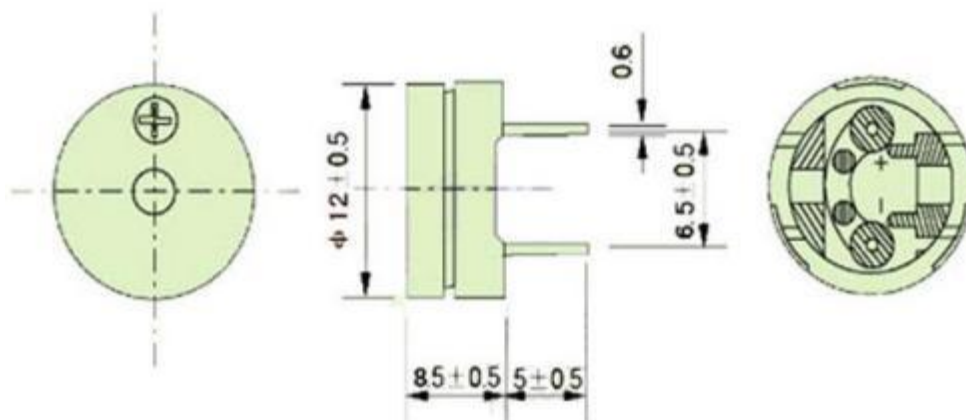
Dimension and footprint of SP1 (unit: mm)
